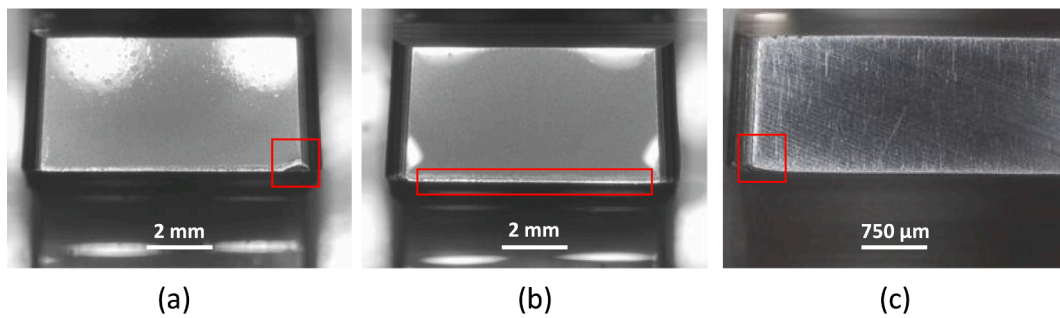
Types of wear found during the experimental testing (a) Tooth fracture (b) Flank tool wear, more common (c) Plastic deformation of the tip.
